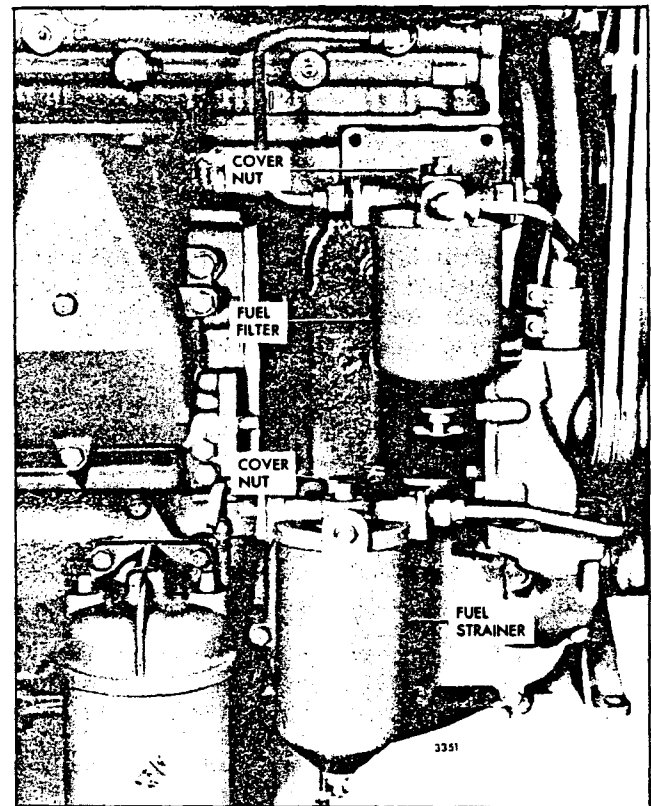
Typical Fuel Strainer and Fuel Filter Mounting (Bolt-On Type)
